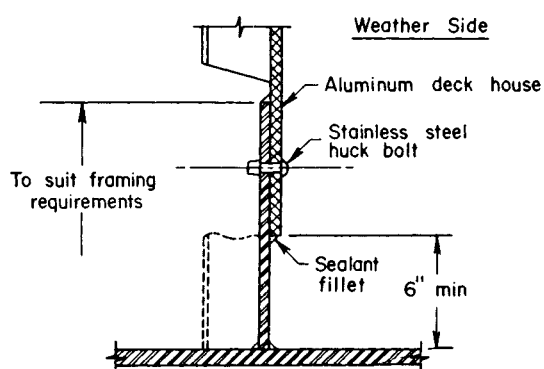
ALUMINUM DECKHOUSE JOINT DETAIL(103)
